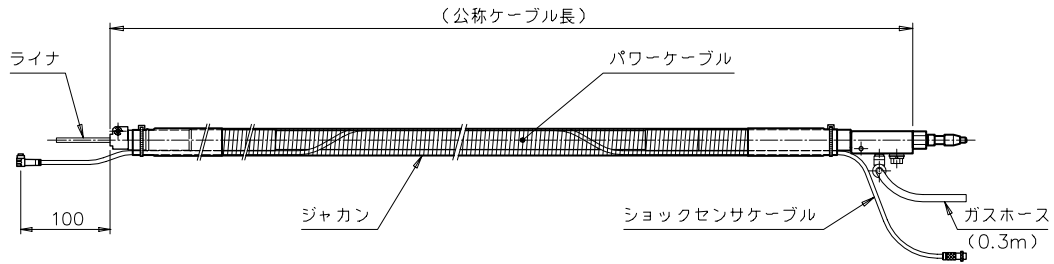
Outline drawing of the coaxial power cable (For V4AP/V4LAP exclusive use)
